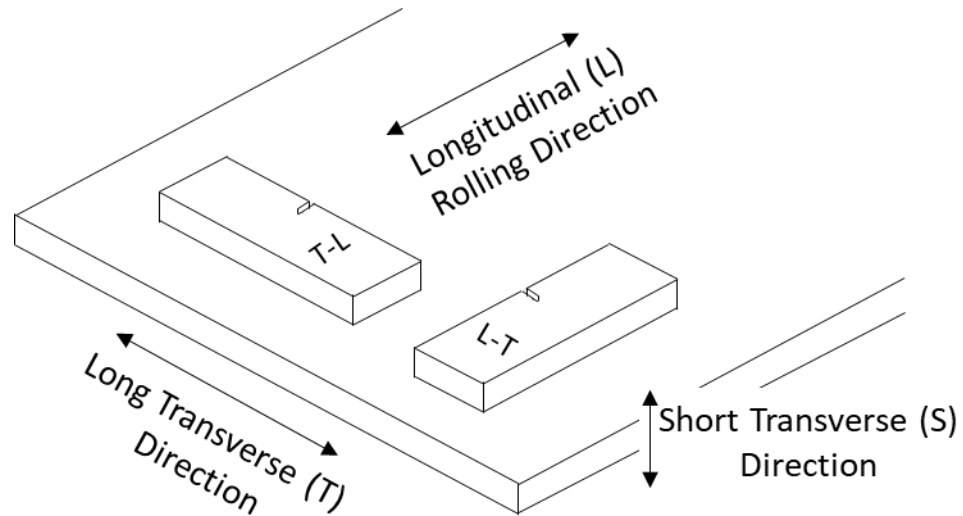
Single edge notch tension (SENT) specimen machined from sheet of Alloy 1 in the T-L and L-T loading orientation, adapted from ASTM E399-22 [25].
